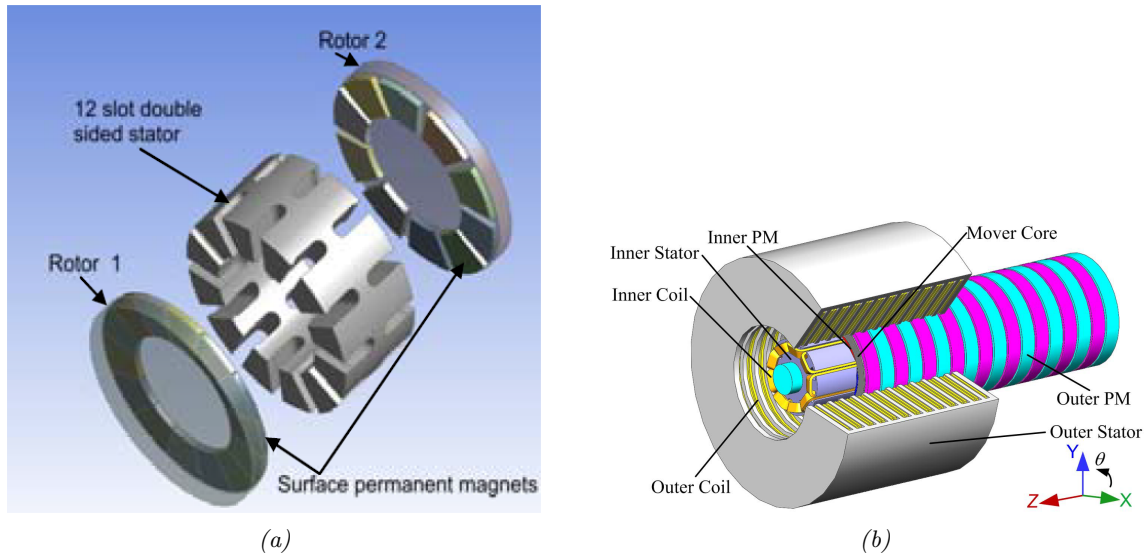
(a) Design of a motor with a dual rotor and single stator [4]. (b) Design of a rotary-linear motor [5].
